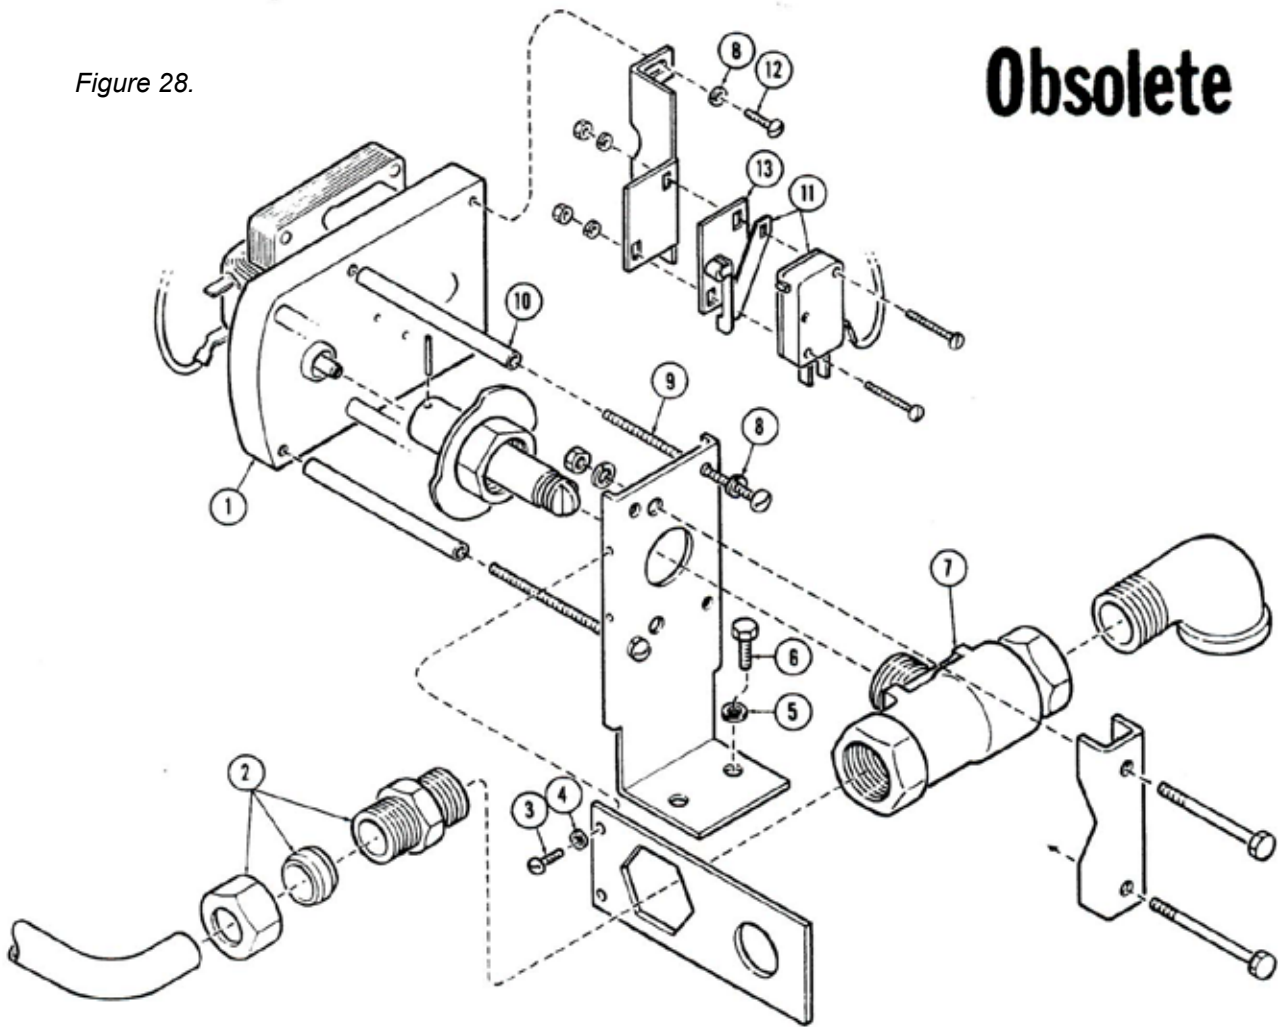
Steam Exhaust Valve Assembly (Obsolete)
